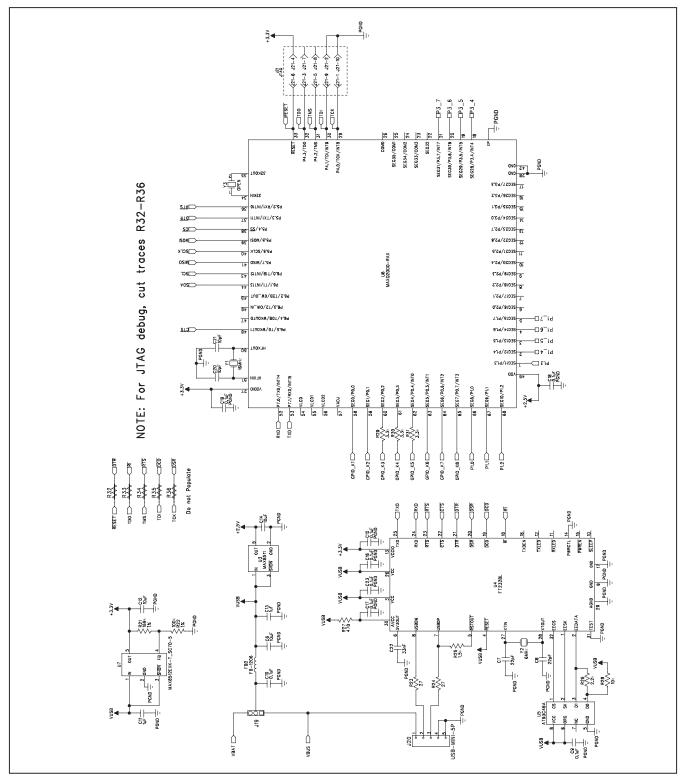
MAX11800-MAX11803 Interface Board Schematic (Sheet 2 of 2)
